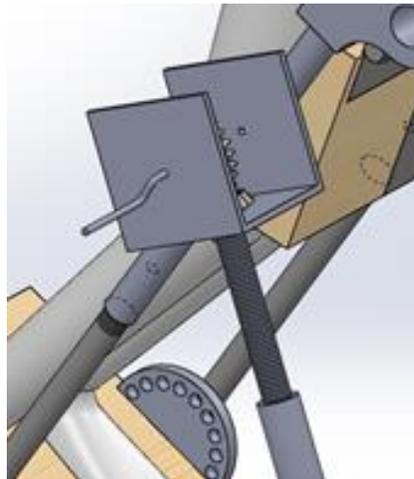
Gearbox can be manually operated with a handle to drive the lead screw.
